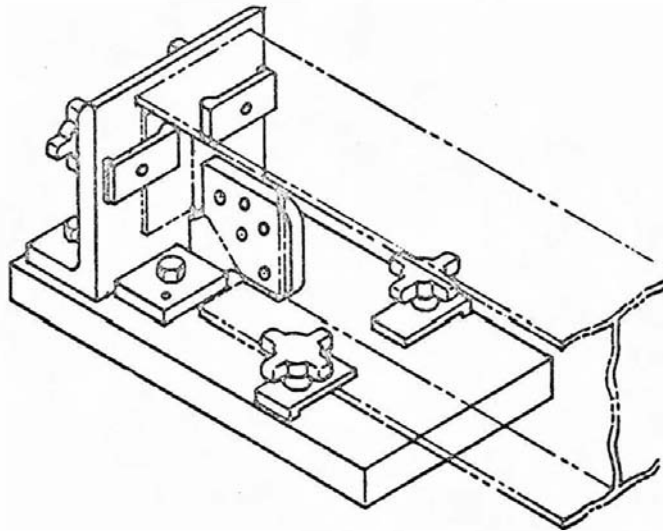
14. Base Heatshield Beam Assembly, Assembly Fixture
